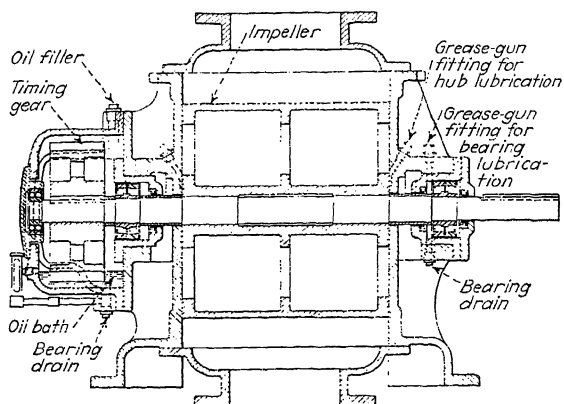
Two-lobe, rotary-displacement compressor with roller bearings.
